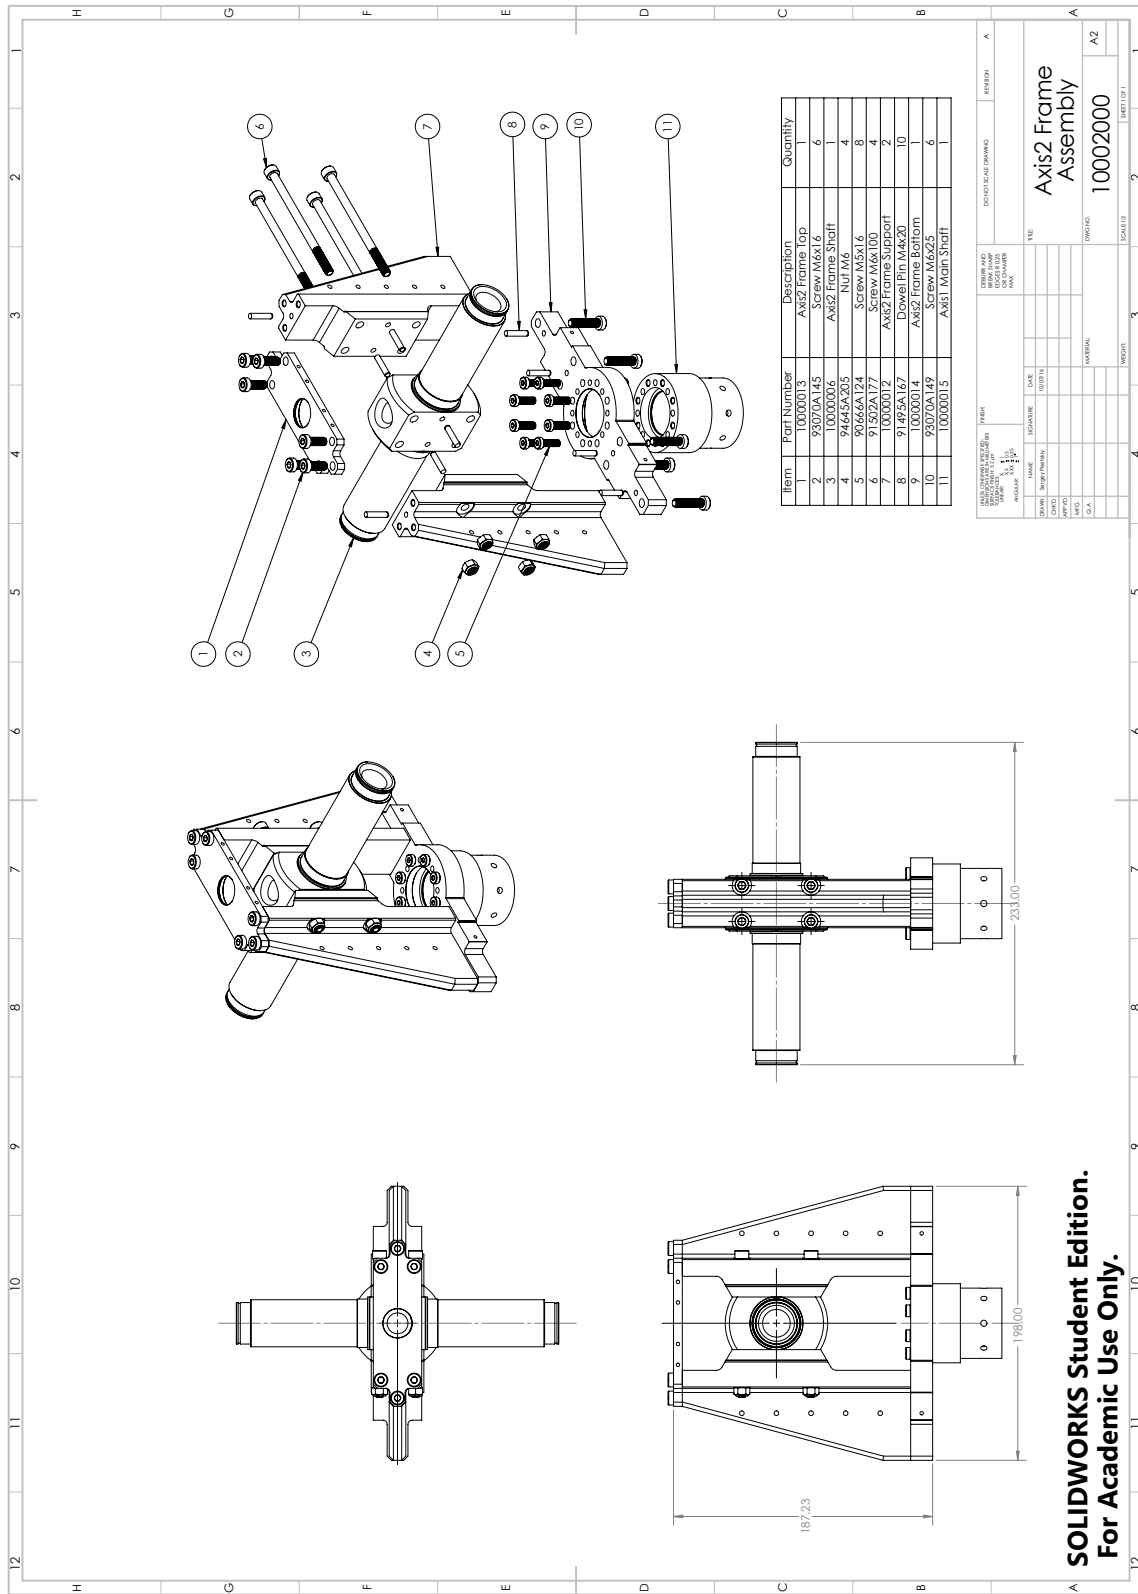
Drawing: Link 1 joint 2 frame assembly.
